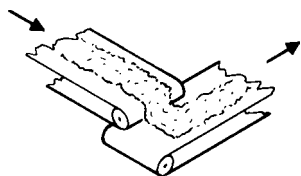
Simple intersection. Incoming conveyor section overlaps outgoing section and merely dumps material onto lower conveyor.
